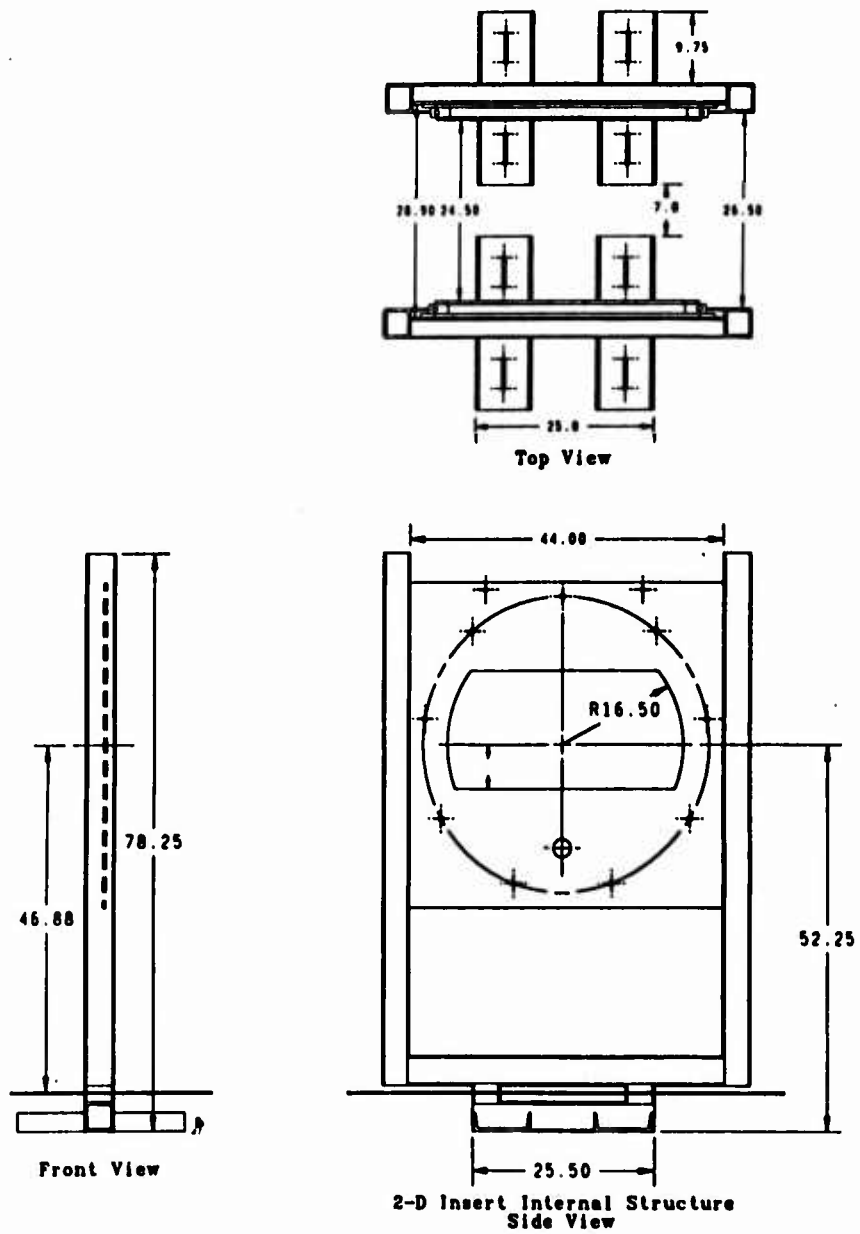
2-D Insert Internal Structure - Side View, Front View and Top View.
